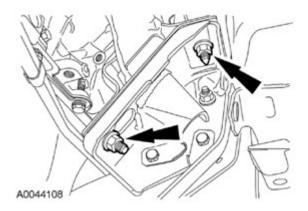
Locating Engine Support Insulator-To-Crossmember Nuts Courtesy of FORD MOTOR CO.
